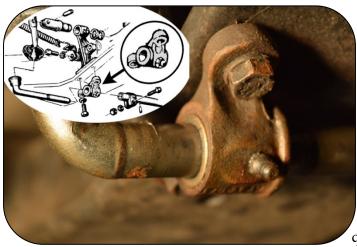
Early shifter support bracket with brass bushing and grease fitting.
